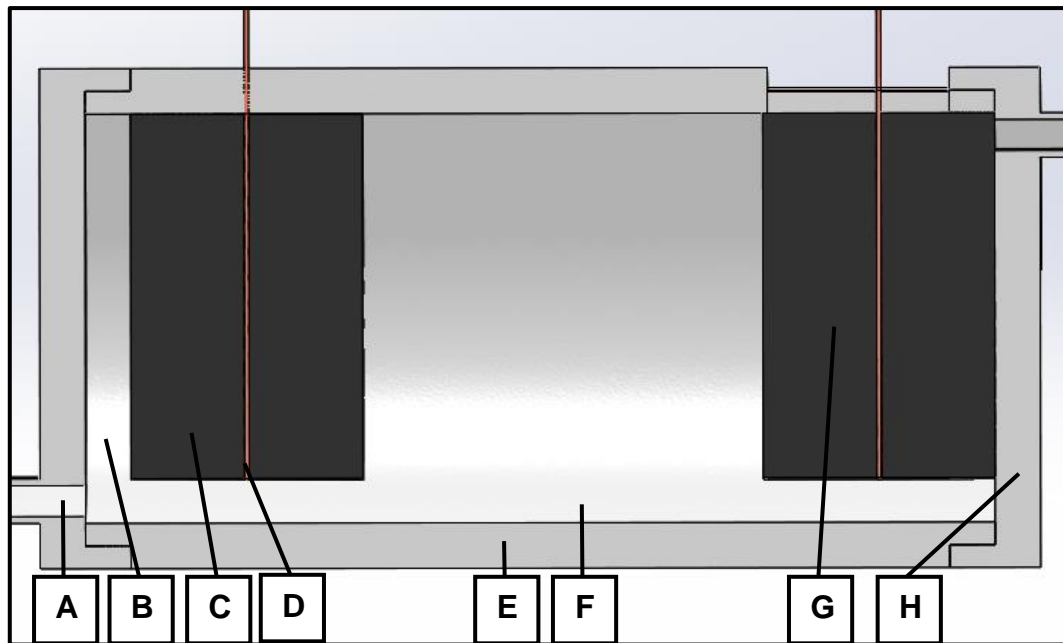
CAD-illustration Cut-view of the New Design solution, side view. A: rotating lid channel, B: clearing, C: anode, D: metal sheet, E: tube, F: tube channel, G: cathode, H: rotating lid.
